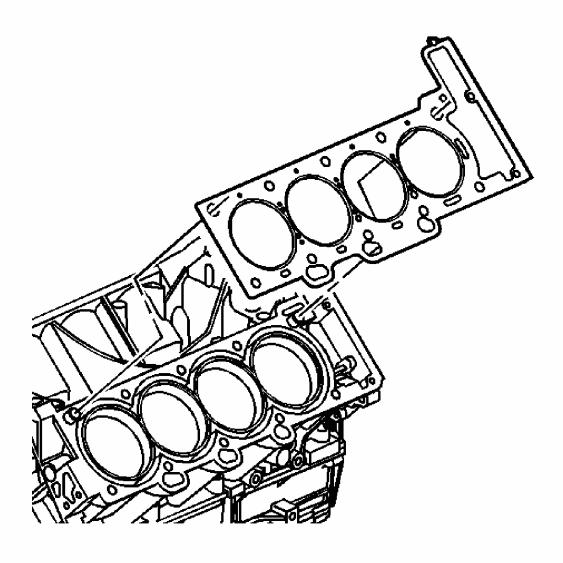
View of Right Cylinder Head Gasket Courtesy of GENERAL MOTORS CORP.
